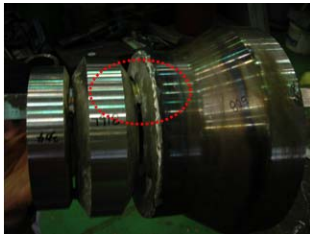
Figures for mock-up fabrication. Note tack-weld within dash circle line
